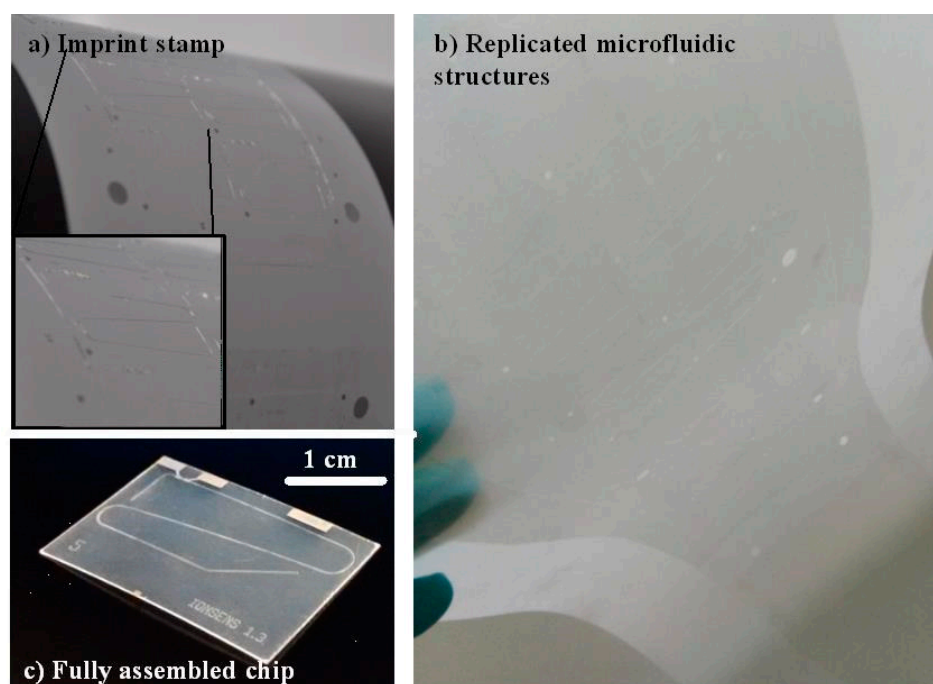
(a) The flexible metalized polymer imprint stamp wrapped around an imprint cylinder. (b) microfluidic structures replicated in UV NIL Roll-to-Roll process. (c) A fully assembled microfluidic CE chip.
